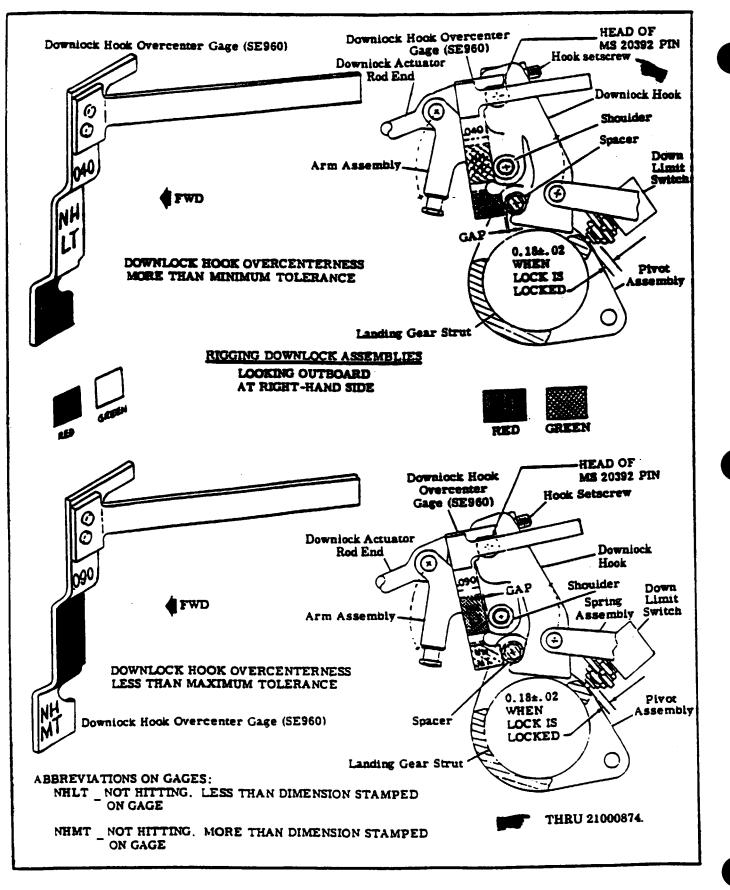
Rigging Main Landing Gear (Sheet 2 of 3)
